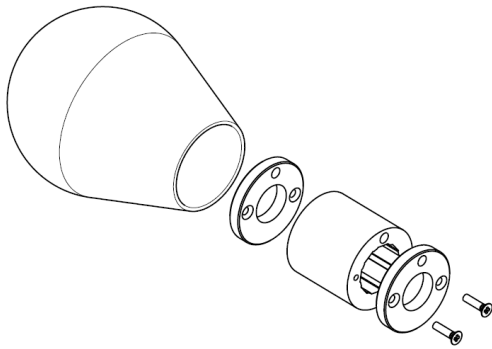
Remove the crosshead screws on the actuator part 1, replace the slide bearings on both side with the new ones.
